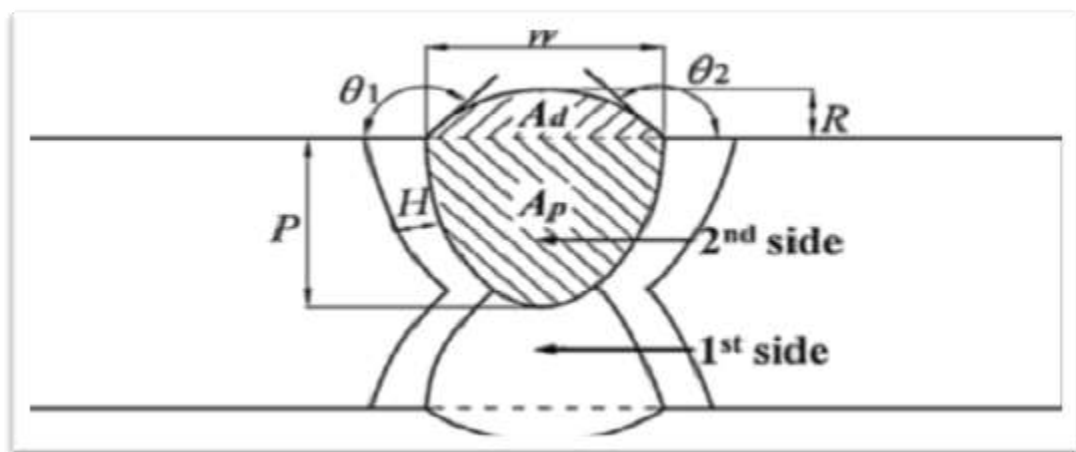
A schematic diagram of typical SAW welded butt joints with no bevel or gap (Shen et al., 2012)
